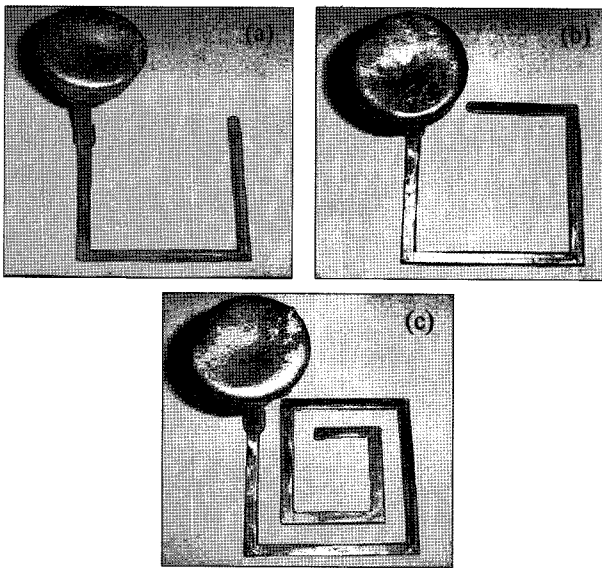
Test castings for fluidity measurement according to coating thickness; (a) 0 mm, (b) 0.05 mm, and (c) 0.1 mm.
